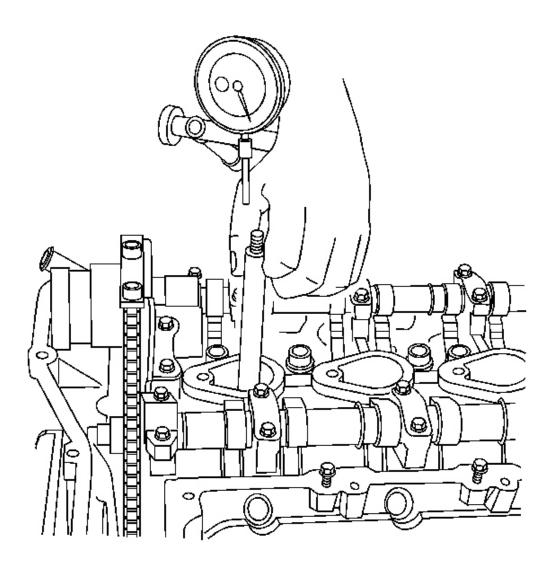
Rotating Engine To TDC Courtesy of GENERAL MOTORS CORP.
